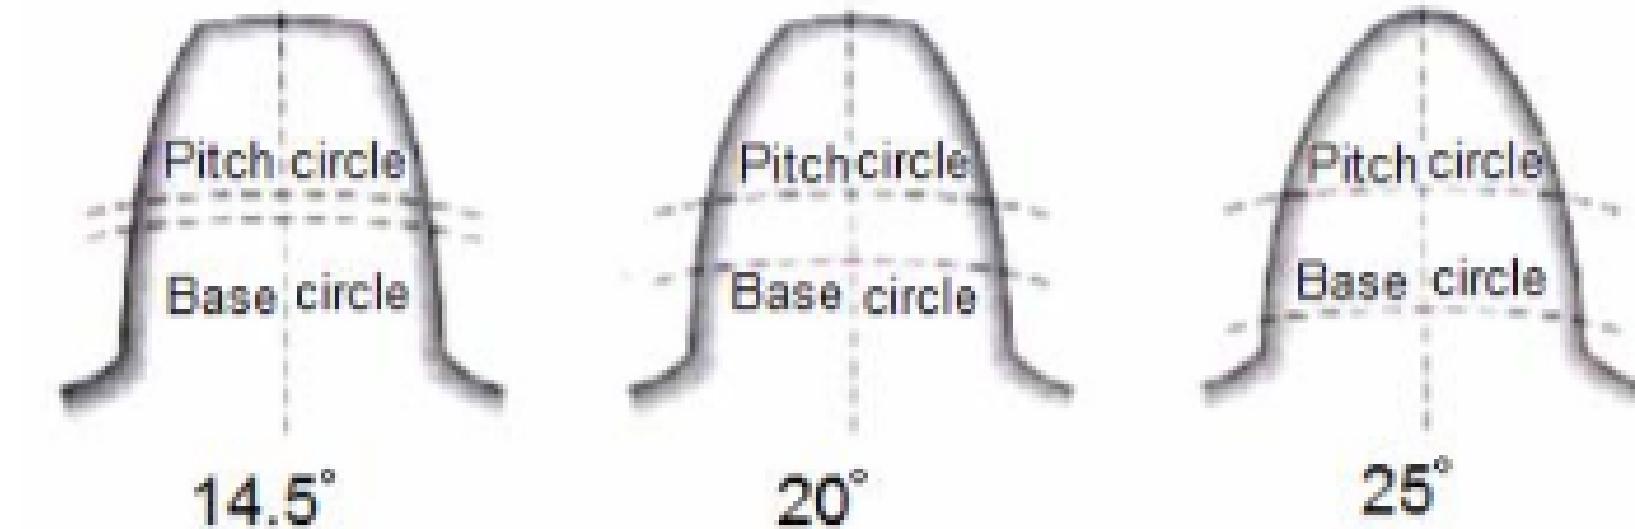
Gear Tooth Profile for different Pressure Angles
